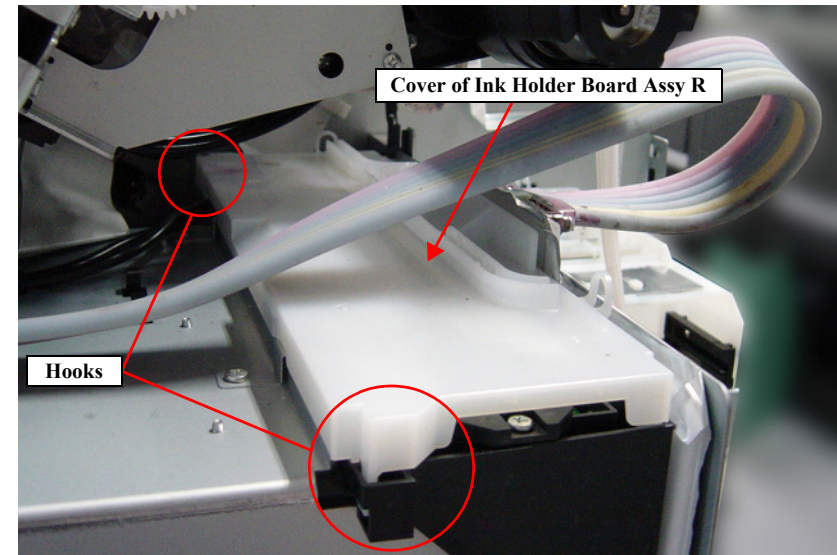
Removing the Cover of Ink Holder Board Assy R
